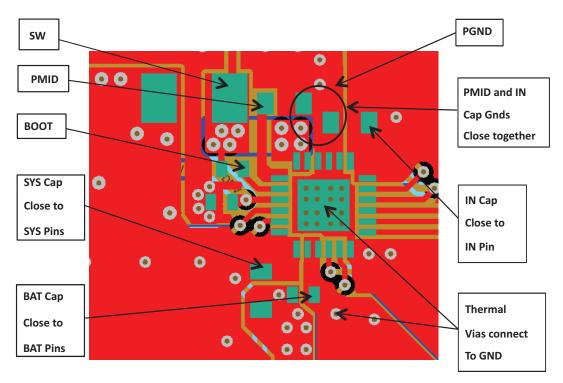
Recommended bq24188 PCB Layout for QFN Package
